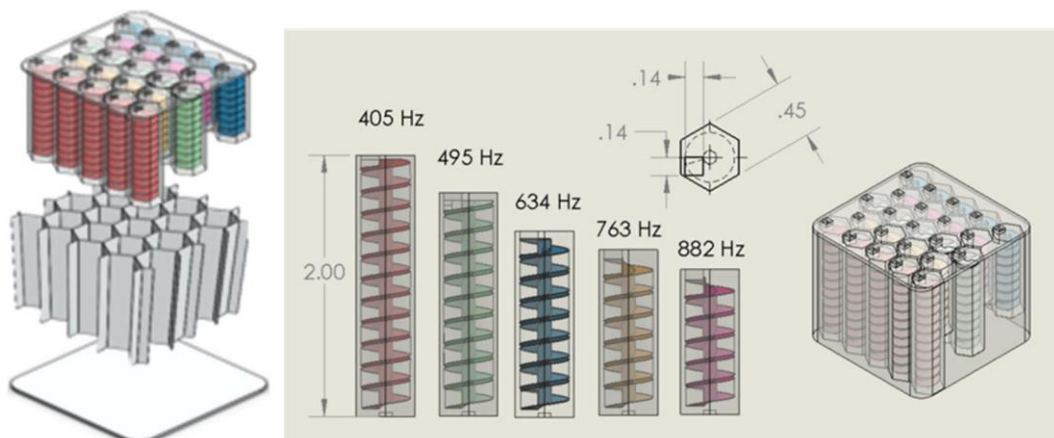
CAD drawing for the broadband spiral insert liner design [37]
